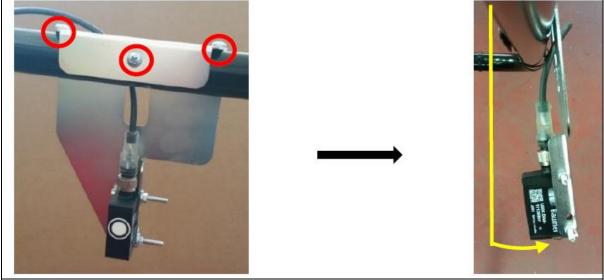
Secure the wheel guard to the tube using the relative ties.
